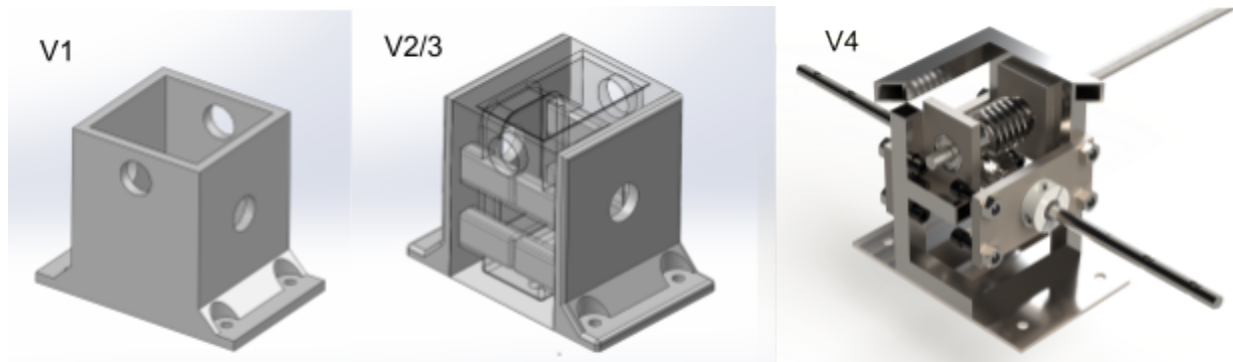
Progression of gearboxes. V1 (melted) V2 (accommodates welded gear, stronger, but not strong enough) V3 (Same as V2 but PETG and even more beefed up) V4 (precision machined metal)
